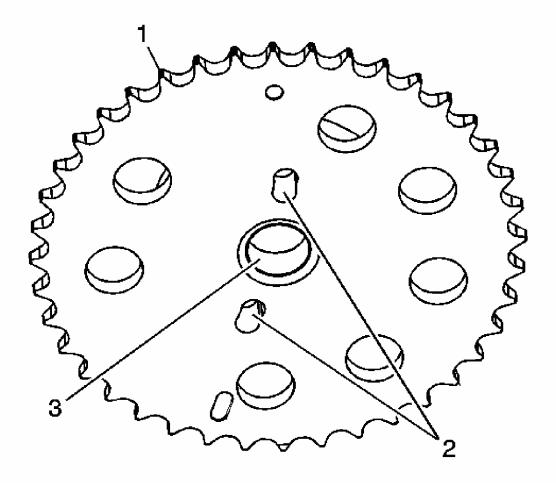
View Of Inspection Areas Of Front Of Left Exhaust & Intake Camshaft Sprockets
